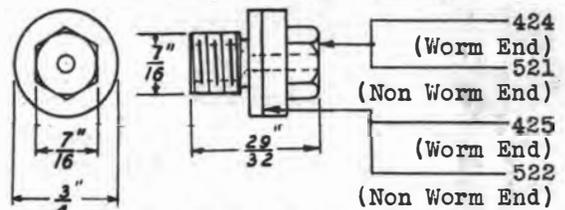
Filling Plug - Collar H. Plug (Vented Plug)
